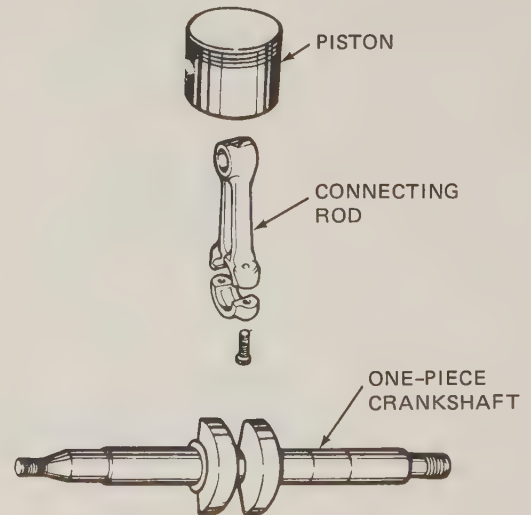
Crankshaft, connecting rod, and piston from a single-cylinder engine.
